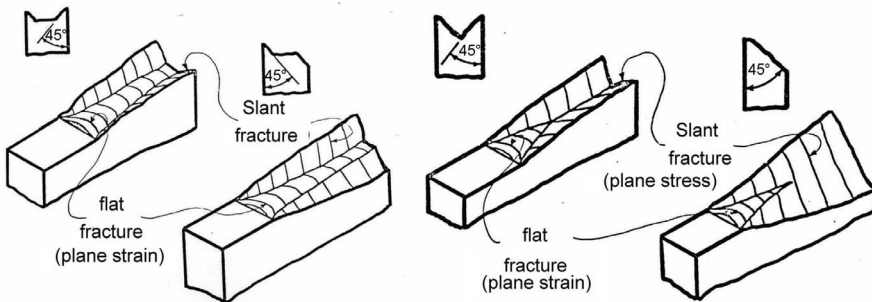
Typical forms of the fracture surface for plate or thin wall structure
